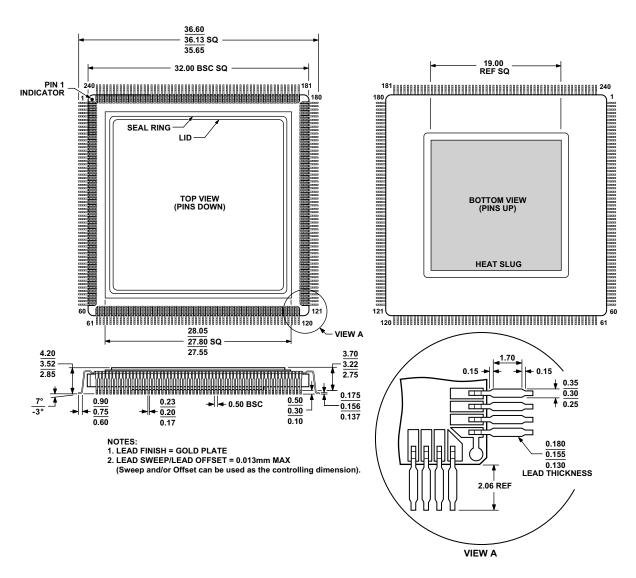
240-Lead Ceramic Quad Flat Package, Heat Slug Down [CQFP]
